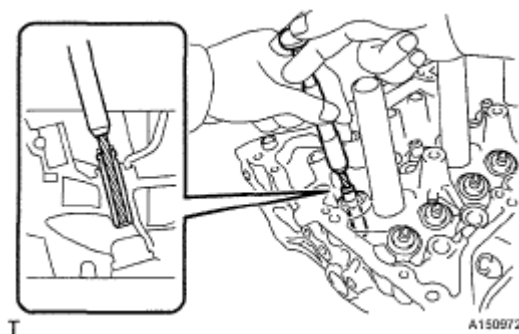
Identifying Standard Clearance Between Guide Bush And Valve Stem
